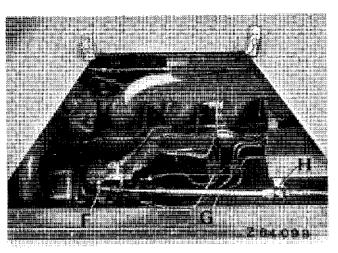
Preparing to Remove Engine at Fuel Injection Pump on 975 Combine
